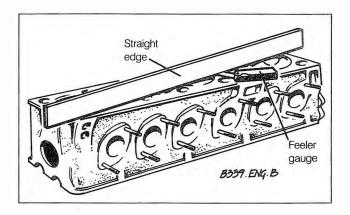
Straight edge and feeler gauge being used to check straightness of cylinder head gasket surface.
